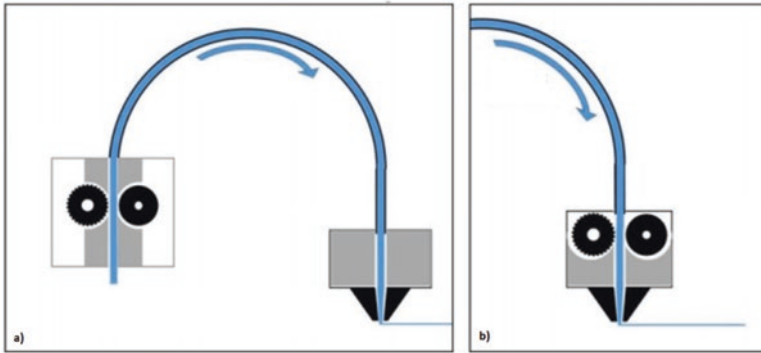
Types of printheads FDM devices (a) Bowden printing system with extruder outside the printhead, (b) Direct printing system with extruder directly on the printhead (a)
